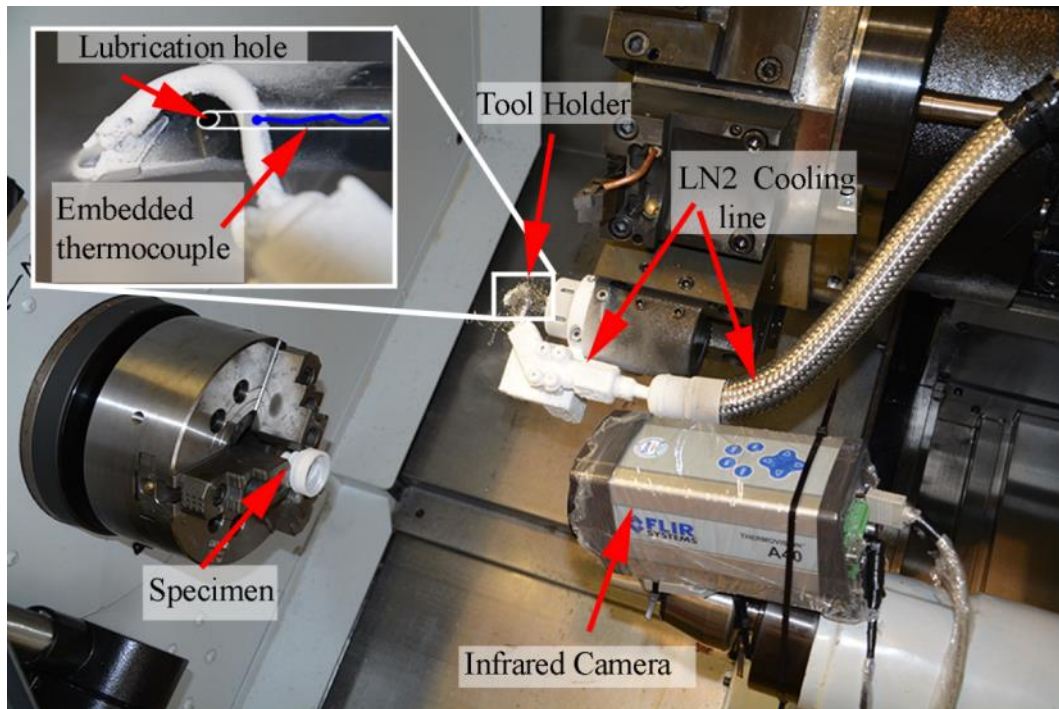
Experimental set up used to machine the test specimen and the acetabular cup, allowing the acquisition of the tool holder and the workpiece temperature.
